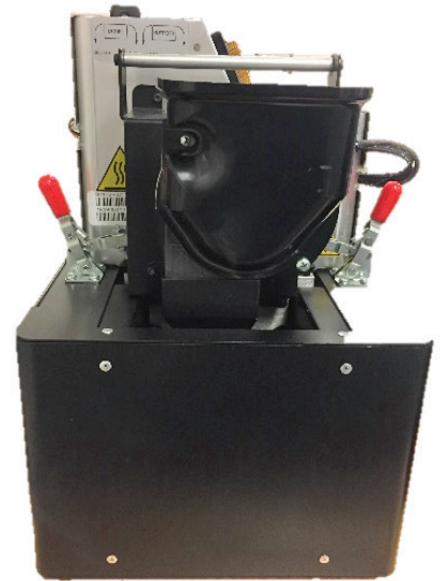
A compatible head assembly is required for FDM Nylon 12CF. The head assembly that is not in use should be properly stored in the docking container.
